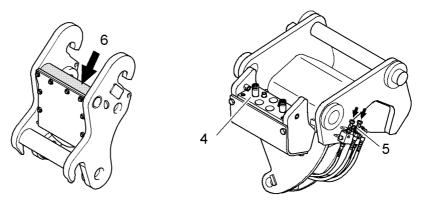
LIKUFIX work tool on quick-change adapter without LIKUFIX
